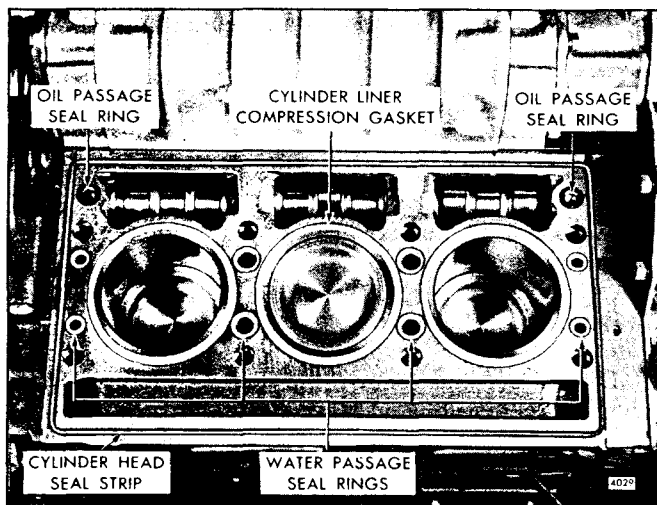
Cylinder Head Gaskets and Seals in Place on Cylinder Block
